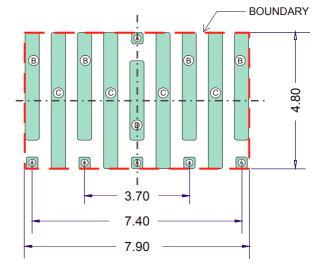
ACFM-7102 Outline and Bottom Metal Superposed on PCB Land Print.
